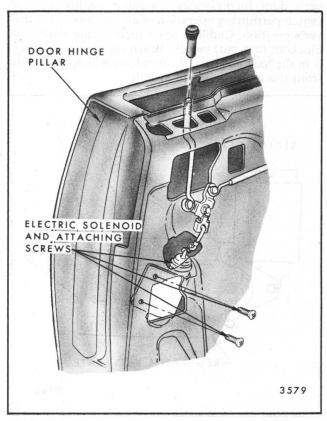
Rear Door Lock Electric Solenoid Installation - "B-C" Styles Shown ("A" Styles Similar)
